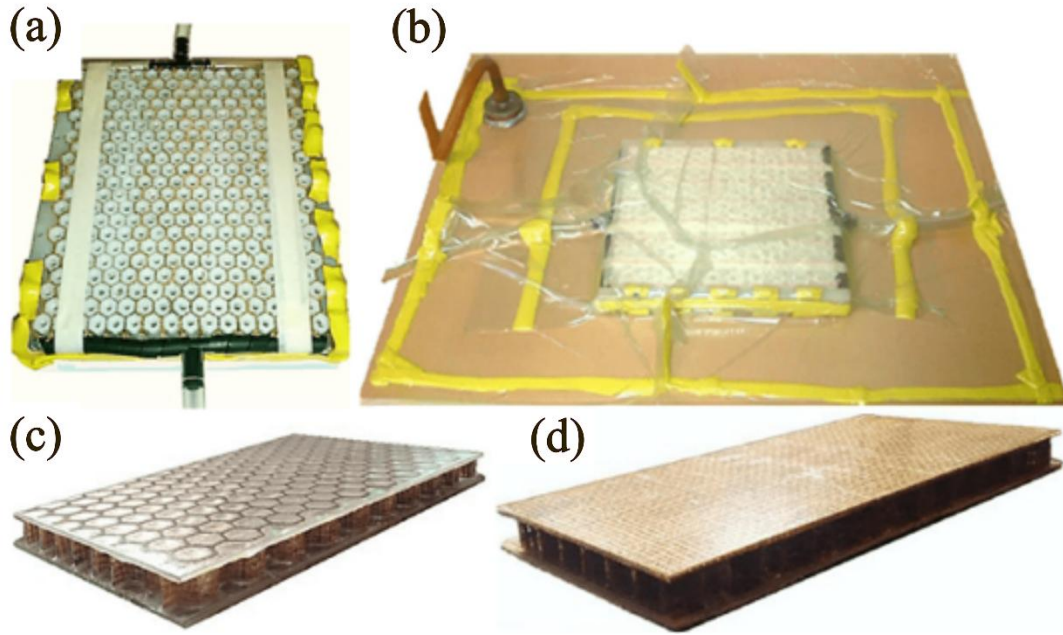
7. Vacuum-assisted resin transfer molding (VARTM) process [34]: (a) Hexagonal molds with jute woven fabric strips fixed in the bottom panel, (b) Resin infusion assisted by a vacuum pump, (c) Sample sandwich panel with glass fiber skins jute fiber honeycomb core, (d) Jute fiber-reinforced honeycomb sandwich panel.
